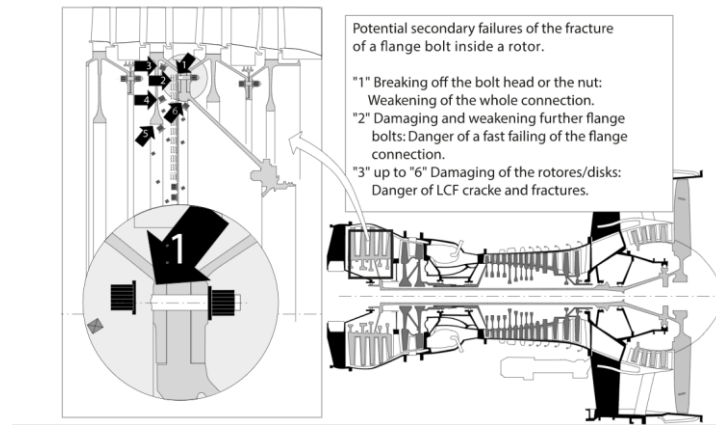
The possible outcomes of bolt fracture inside the aeroengine and the subsequent dangers [126].
